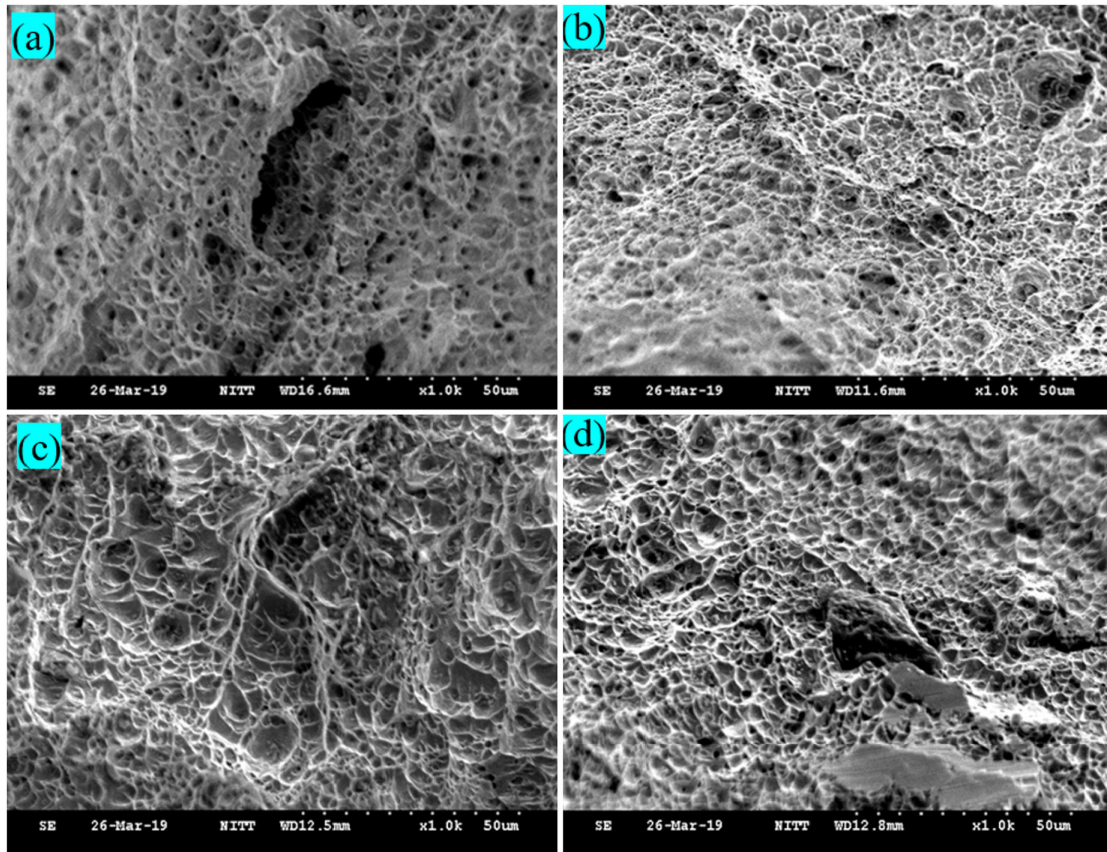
Fractographical analyses by tensile test smooth specimen (a) base metal (b) Weld (c) HAZ and (d) TMAZ of welded samples.
